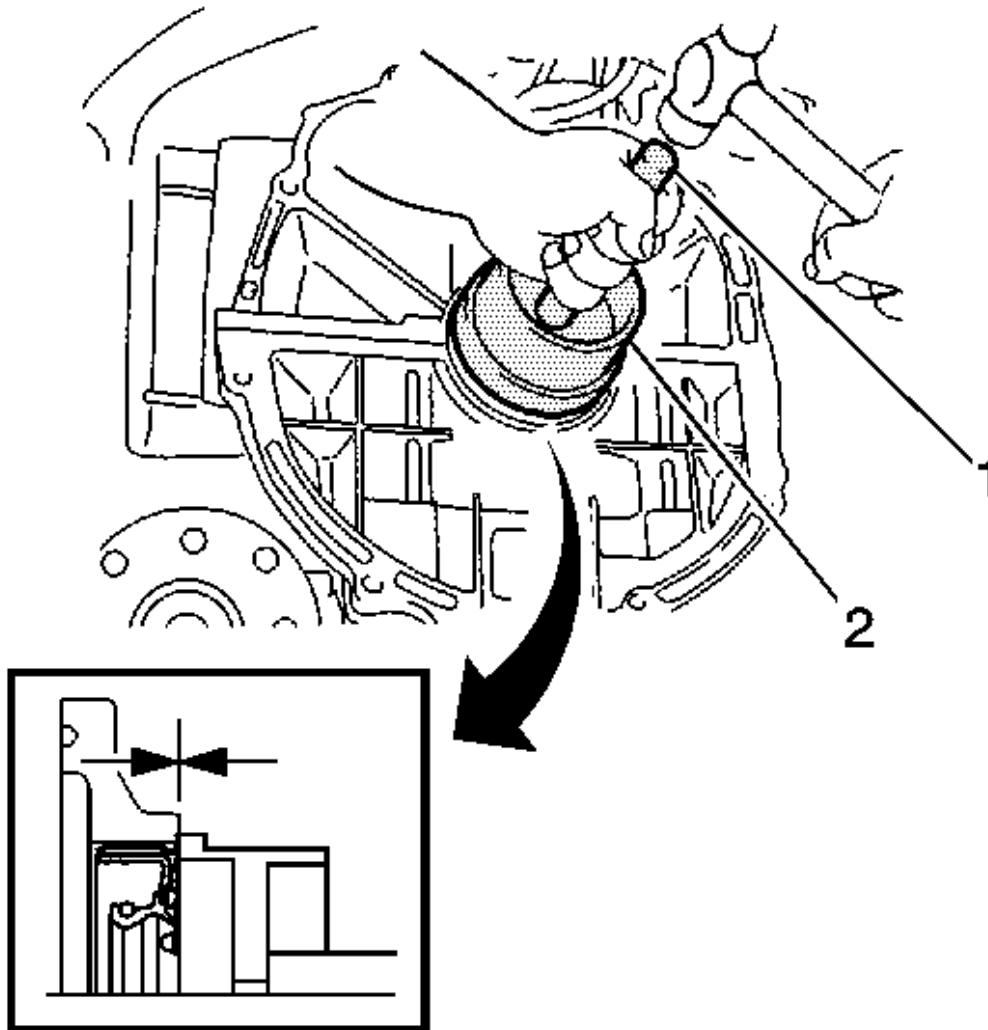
View Of Rear Crankshaft Oil Seal Installation
